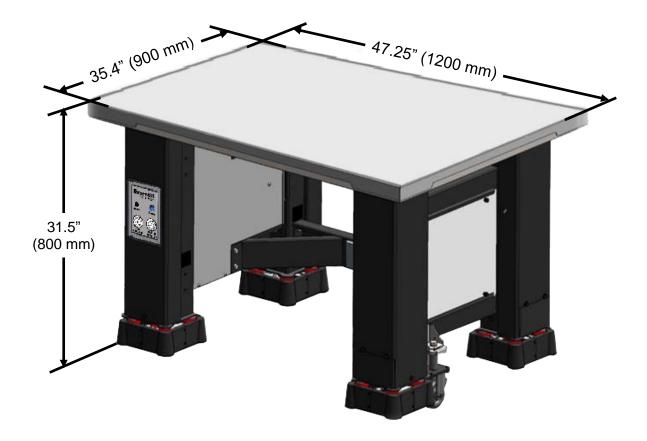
CleanBench<sup>™</sup> Aktiv Dimensional Drawing
